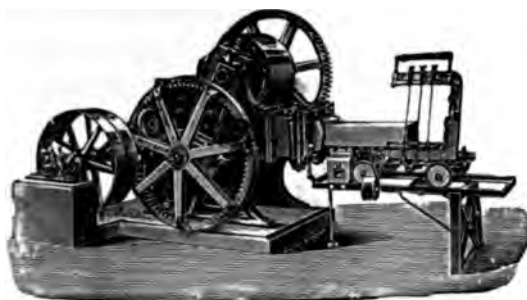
Cylinder Expression Machine (Sachsenberg).
